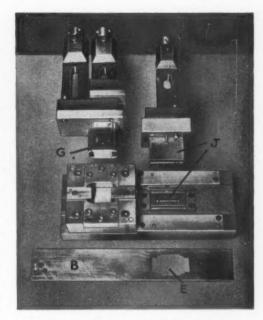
Tooling and Tool-holders Removed from the Machine, to Show Details of the Design
